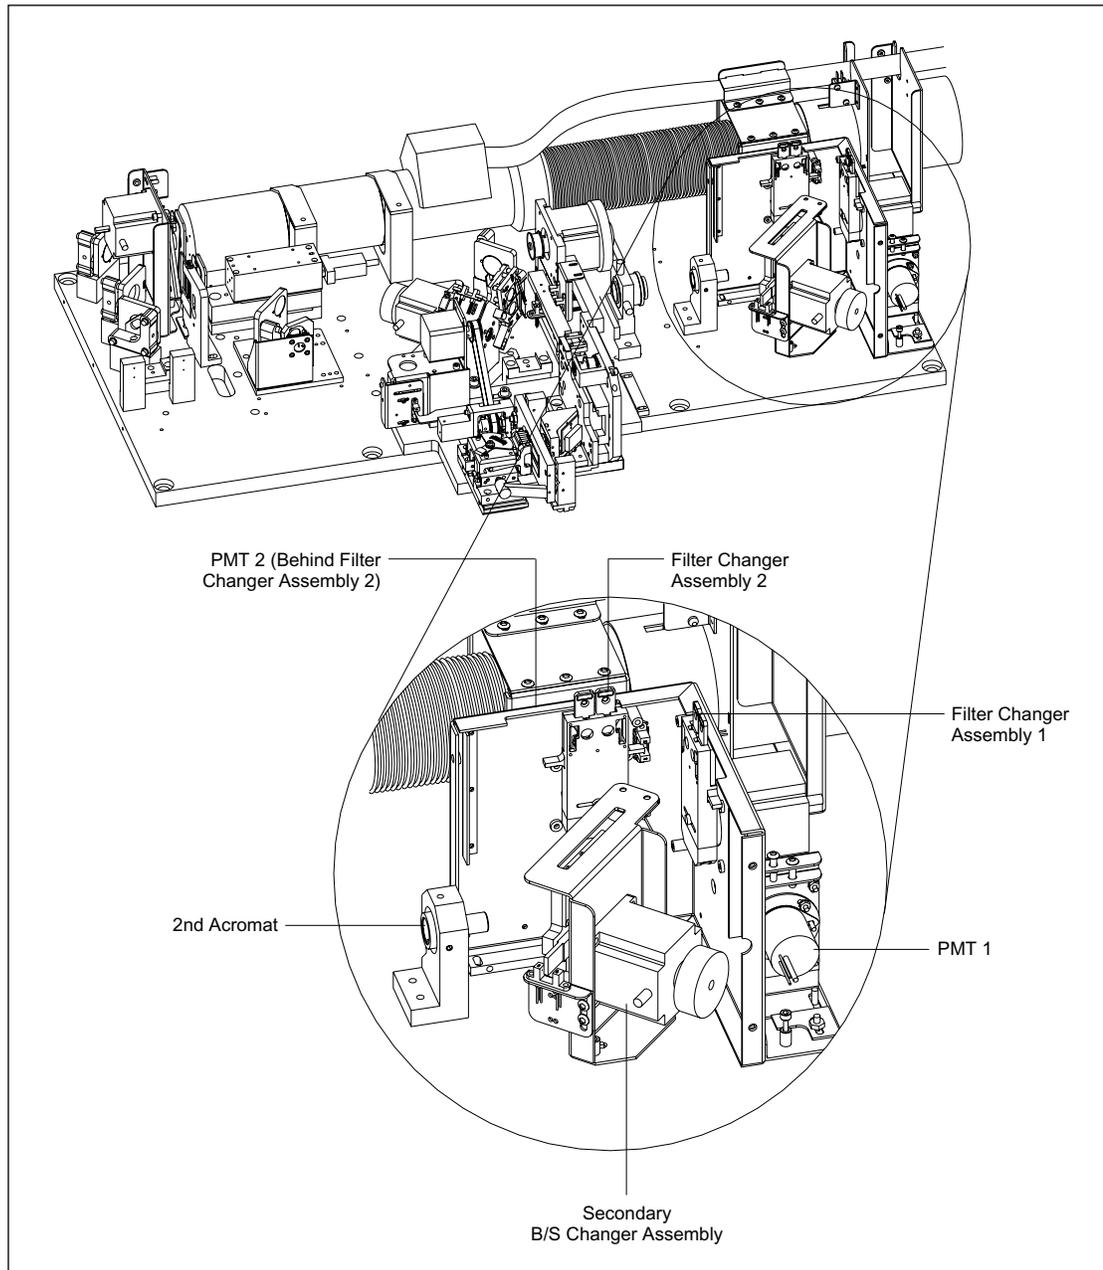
Optical Components Assembly (Sheet 3 of 3).
